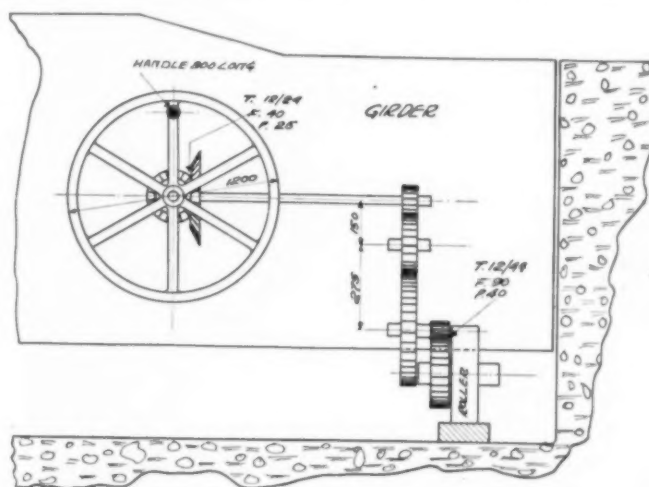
BATTERY TIRPITZ, 280-MM. GUN TRAVERSING GEAR
